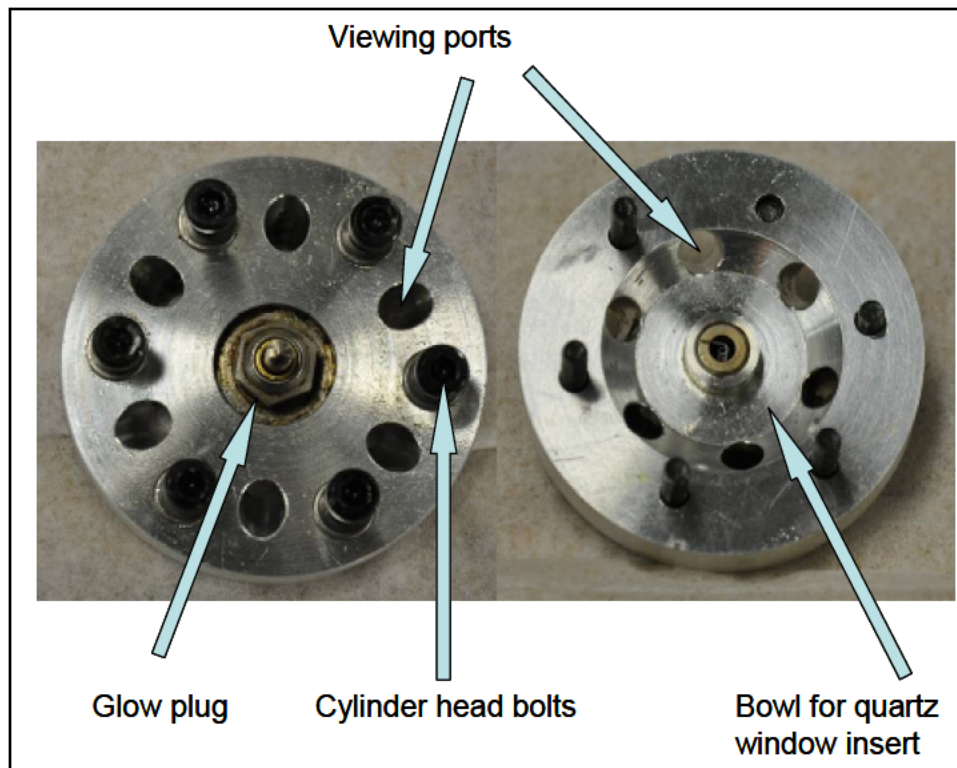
Photographs showing the top and bottom sides of the aluminum clamping ring with glow plug attached.
